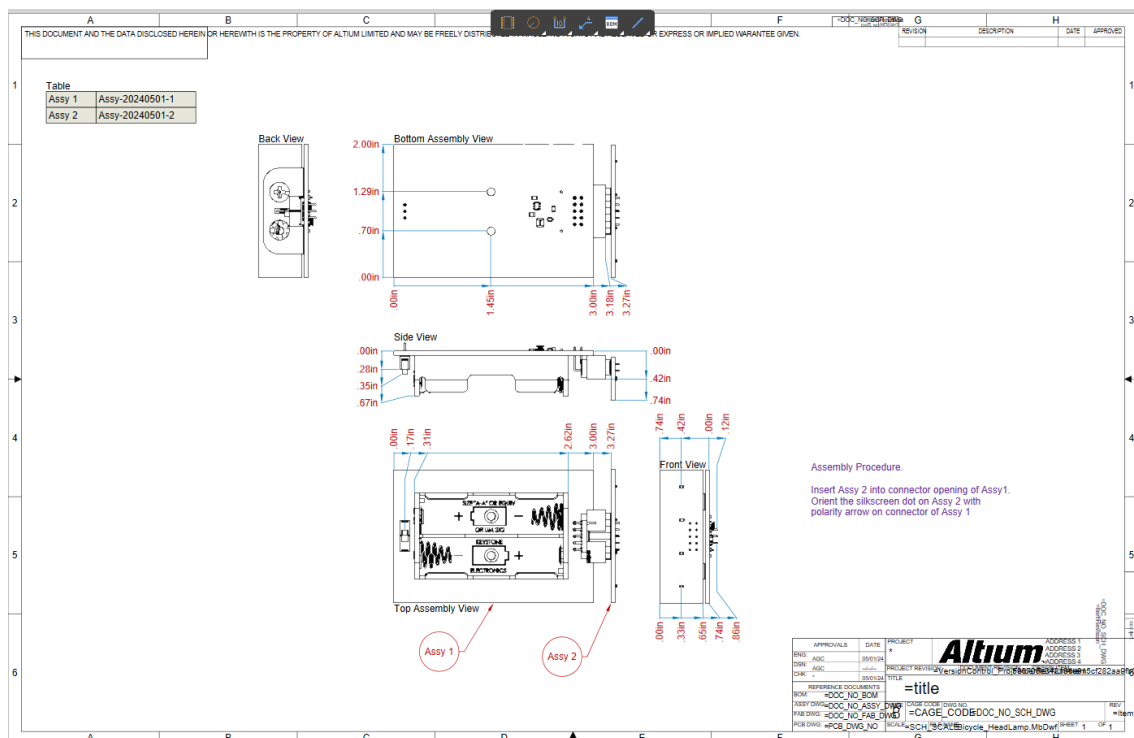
Example of Draftsman Document with Multi-Board Assembly Views, Dimensions, and more
